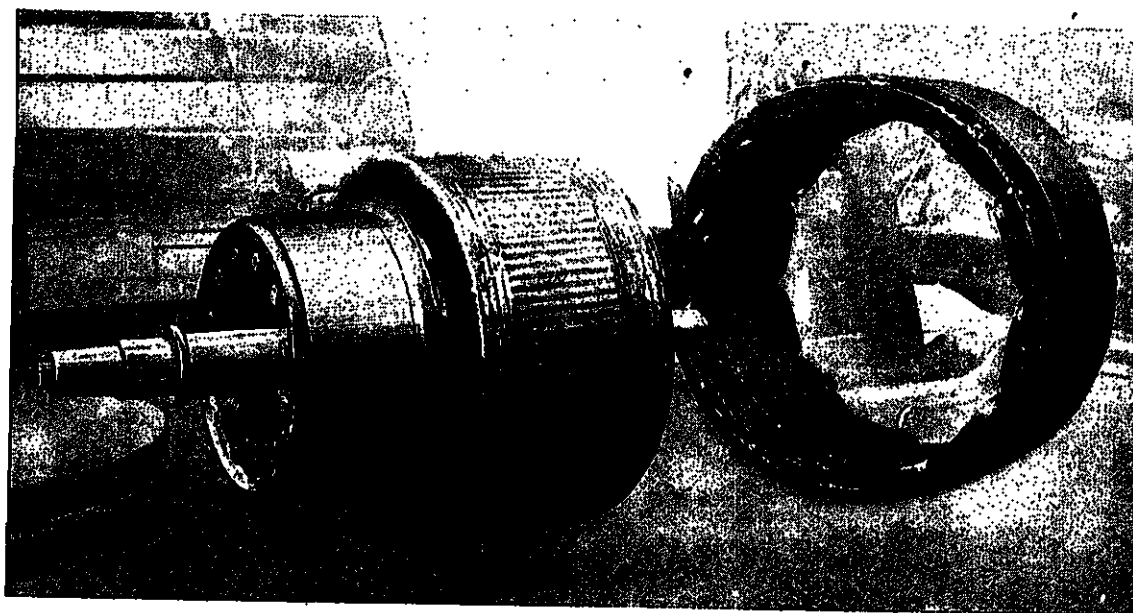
Completed stator and rotor for single-phase series motor type KJ 136.
